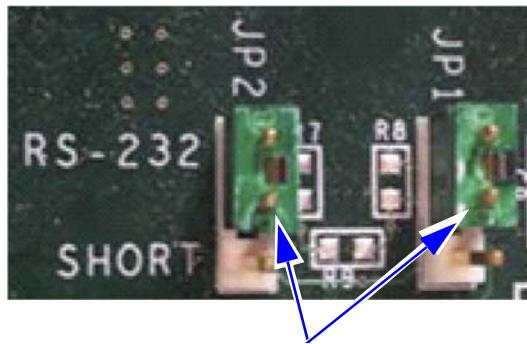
Installing the RS-232 Jumpers (Component Side of Isolation Board)
